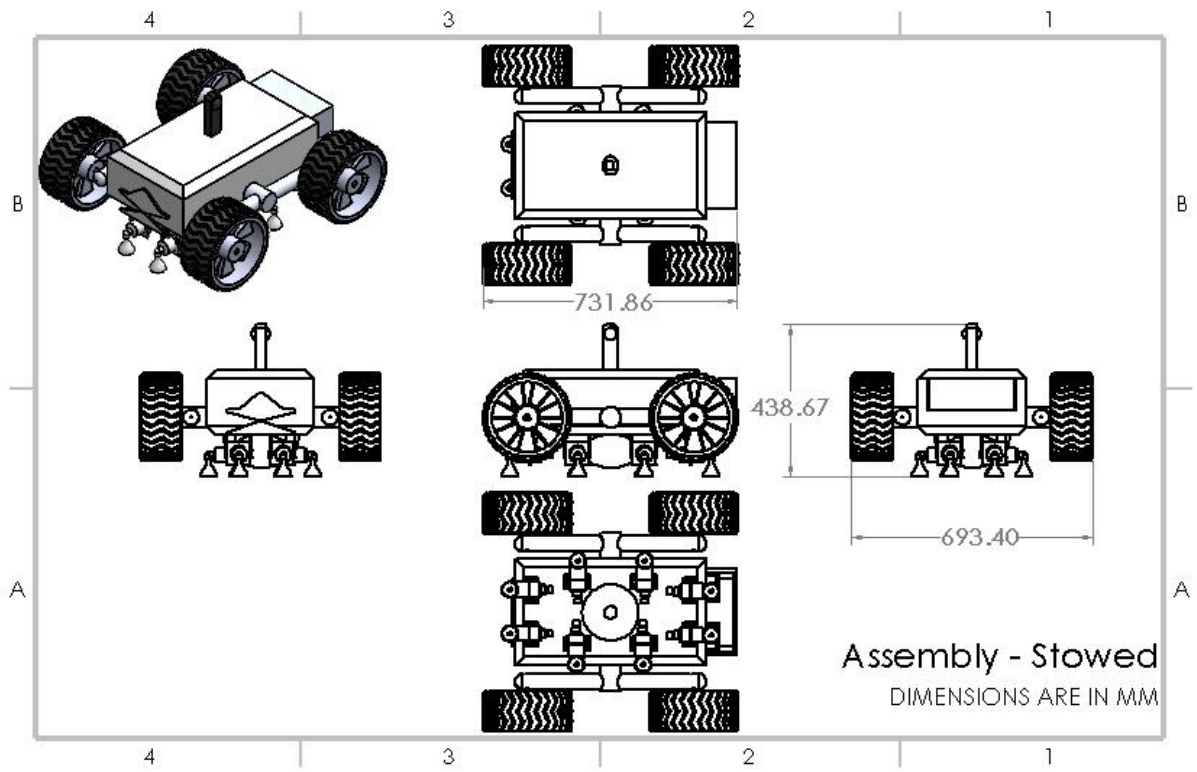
Dimension Drawing, Assembly "Stowed"
